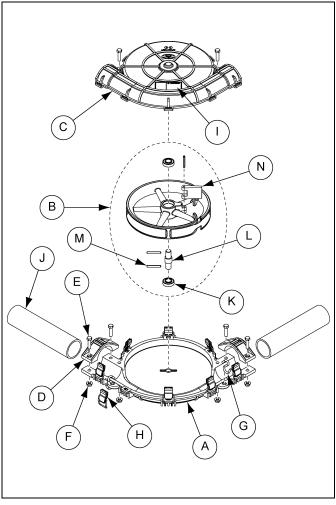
A Chain Disk Horizontal Clear Corner Assembly with Latches
